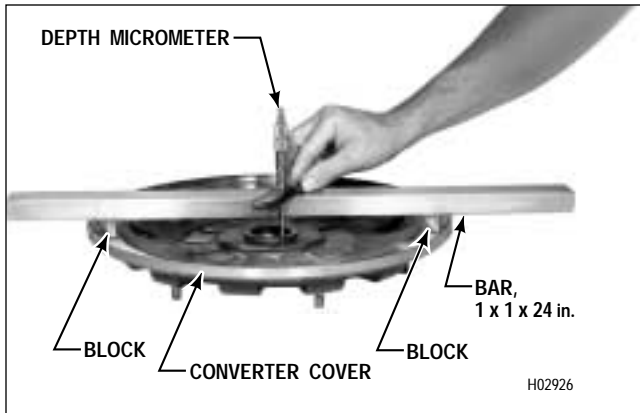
Measuring Dimension A for Selection of Converter Spacer (AT 543)
